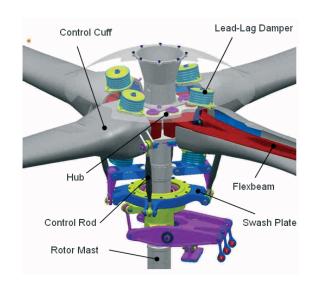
Bearingless Main Rotor system of the EC 135 including rotor mast with integrated hub and rotor blades with Flexbeam.
